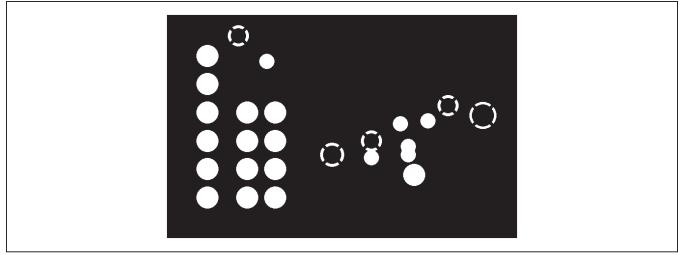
MAX44000PMB11 Peripheral Module PCB Layout—Inner Layer 2 (Power)
